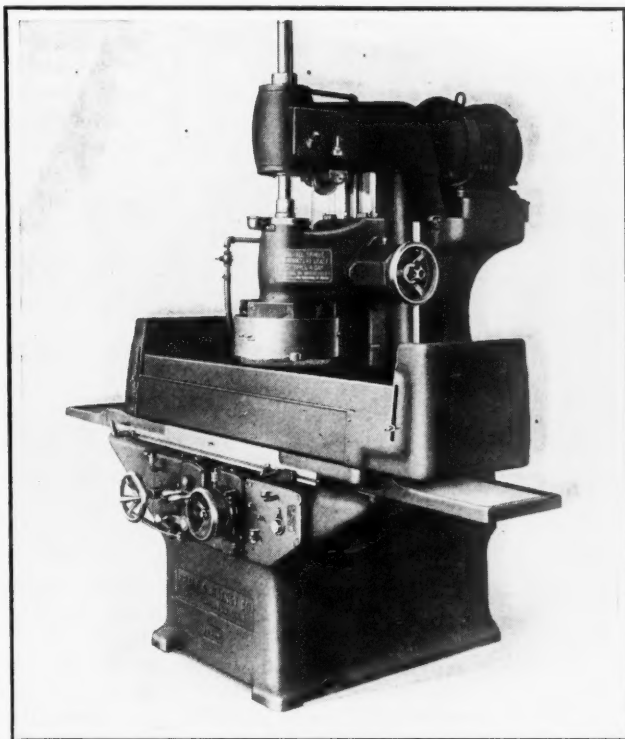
Pratt & Whitney Model B Vertical Surface Grinder
